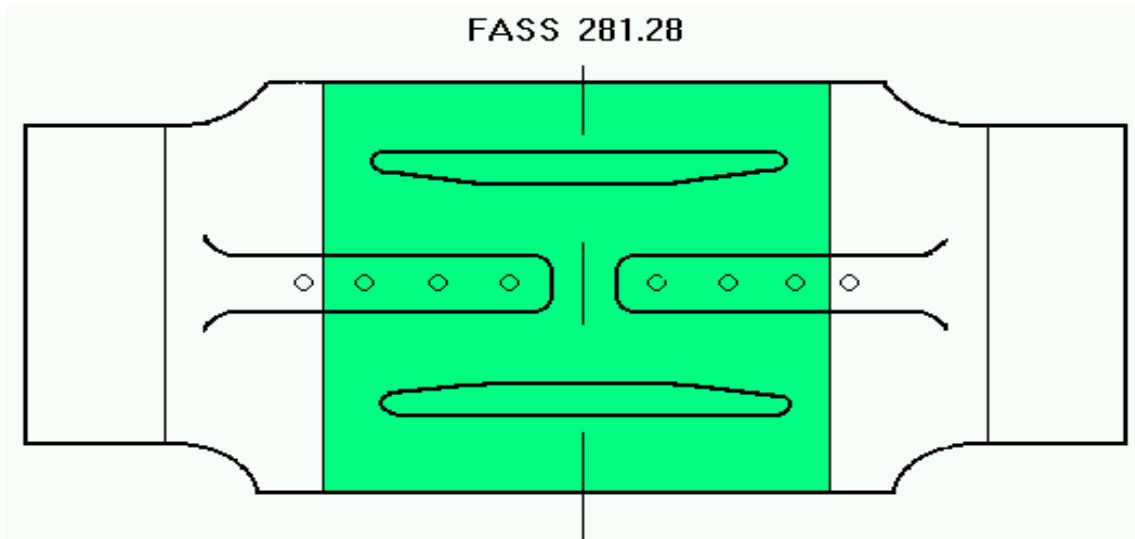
Panel specimen. View onto side representing upper surface of lower wing skin. Boron patch, shown shaded, is bonded to lower surface.
